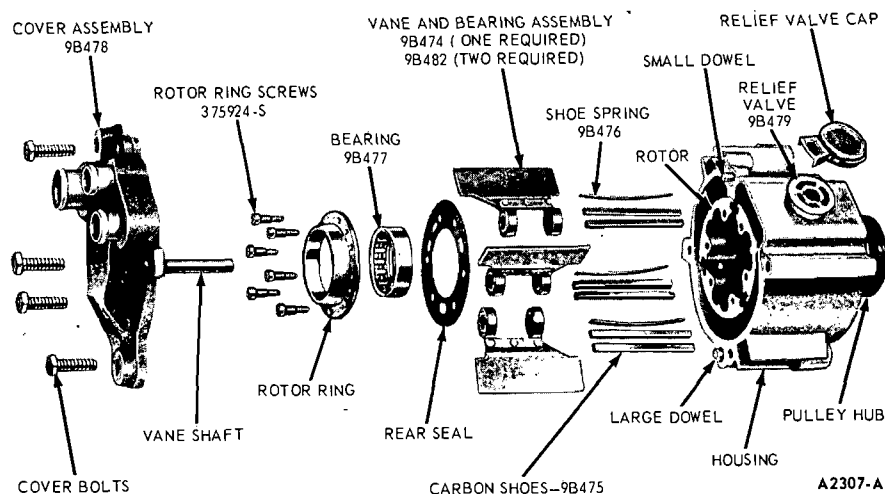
Thermactor System Air Supply Pump—Exploded View
